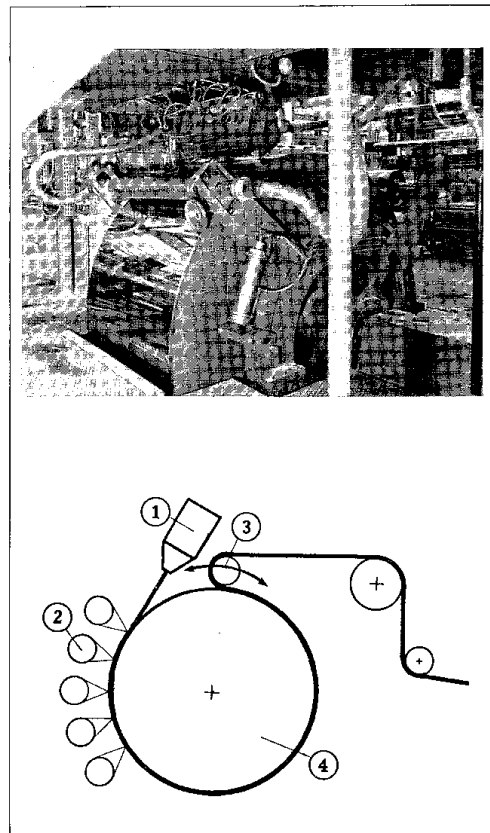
Casting unit (1 = die; 2 = air blade; 3 = casting roll; 4 = film detachment roll).
